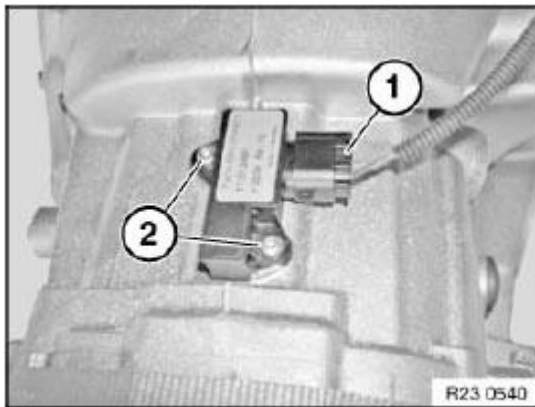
Identifying Plug Connection On Zero Gear Sensor And Screw
